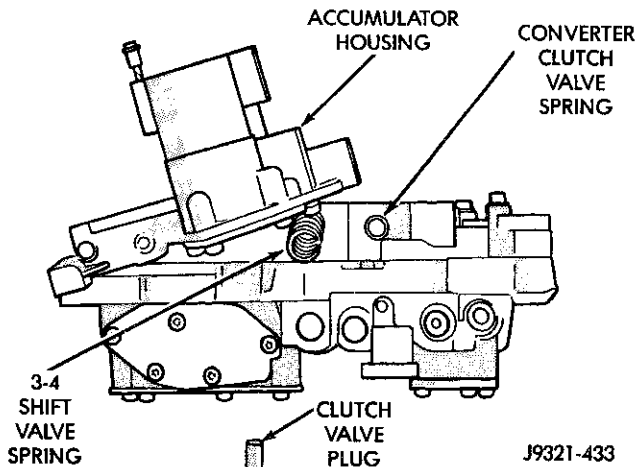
3-4 Shift And Converter Clutch Valve Springs And Plug
